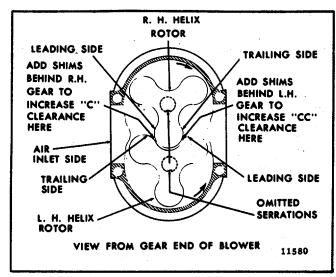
Diagram Showing Proper Location of Shims for Correct Rotor Lobe Clearances
